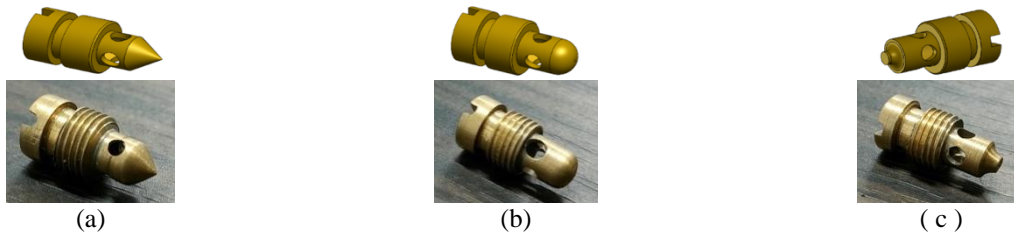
Shape of valve (a) cone; (b) dome, and; (c) fillet
